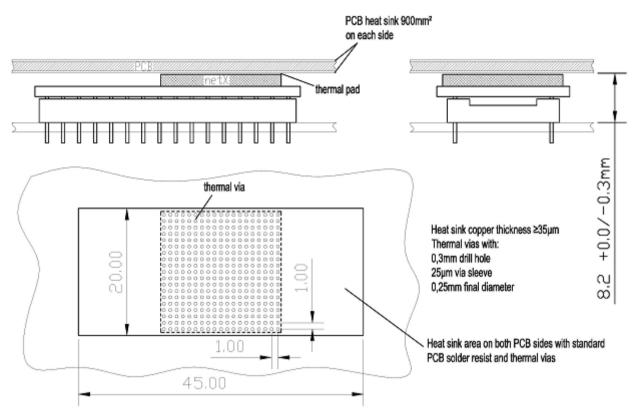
Device Drawing NIC 50-RE without Hilscher's original heat sink and over a PCB heat sink
